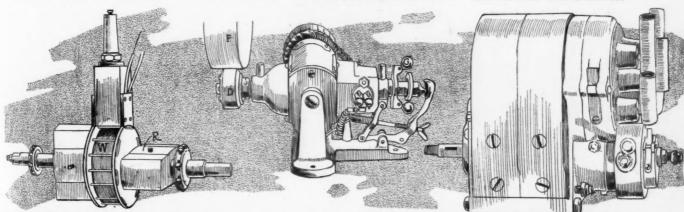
K-W ARMATURE SHAFT AND WINDING FIG. 16-BALL GOVERNED MOTSINGER
